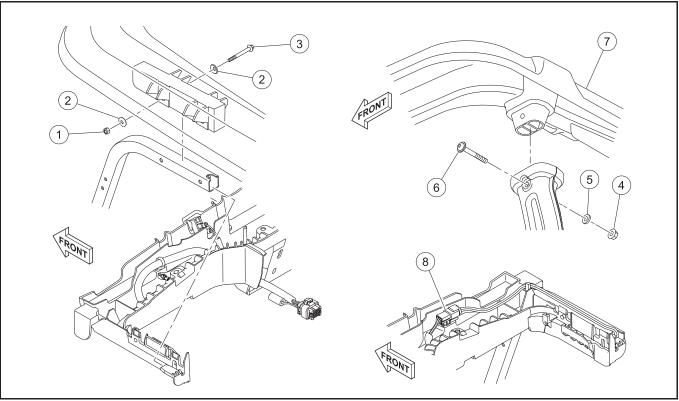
Two-Passenger Canopy With Visage Display Unit Removal
